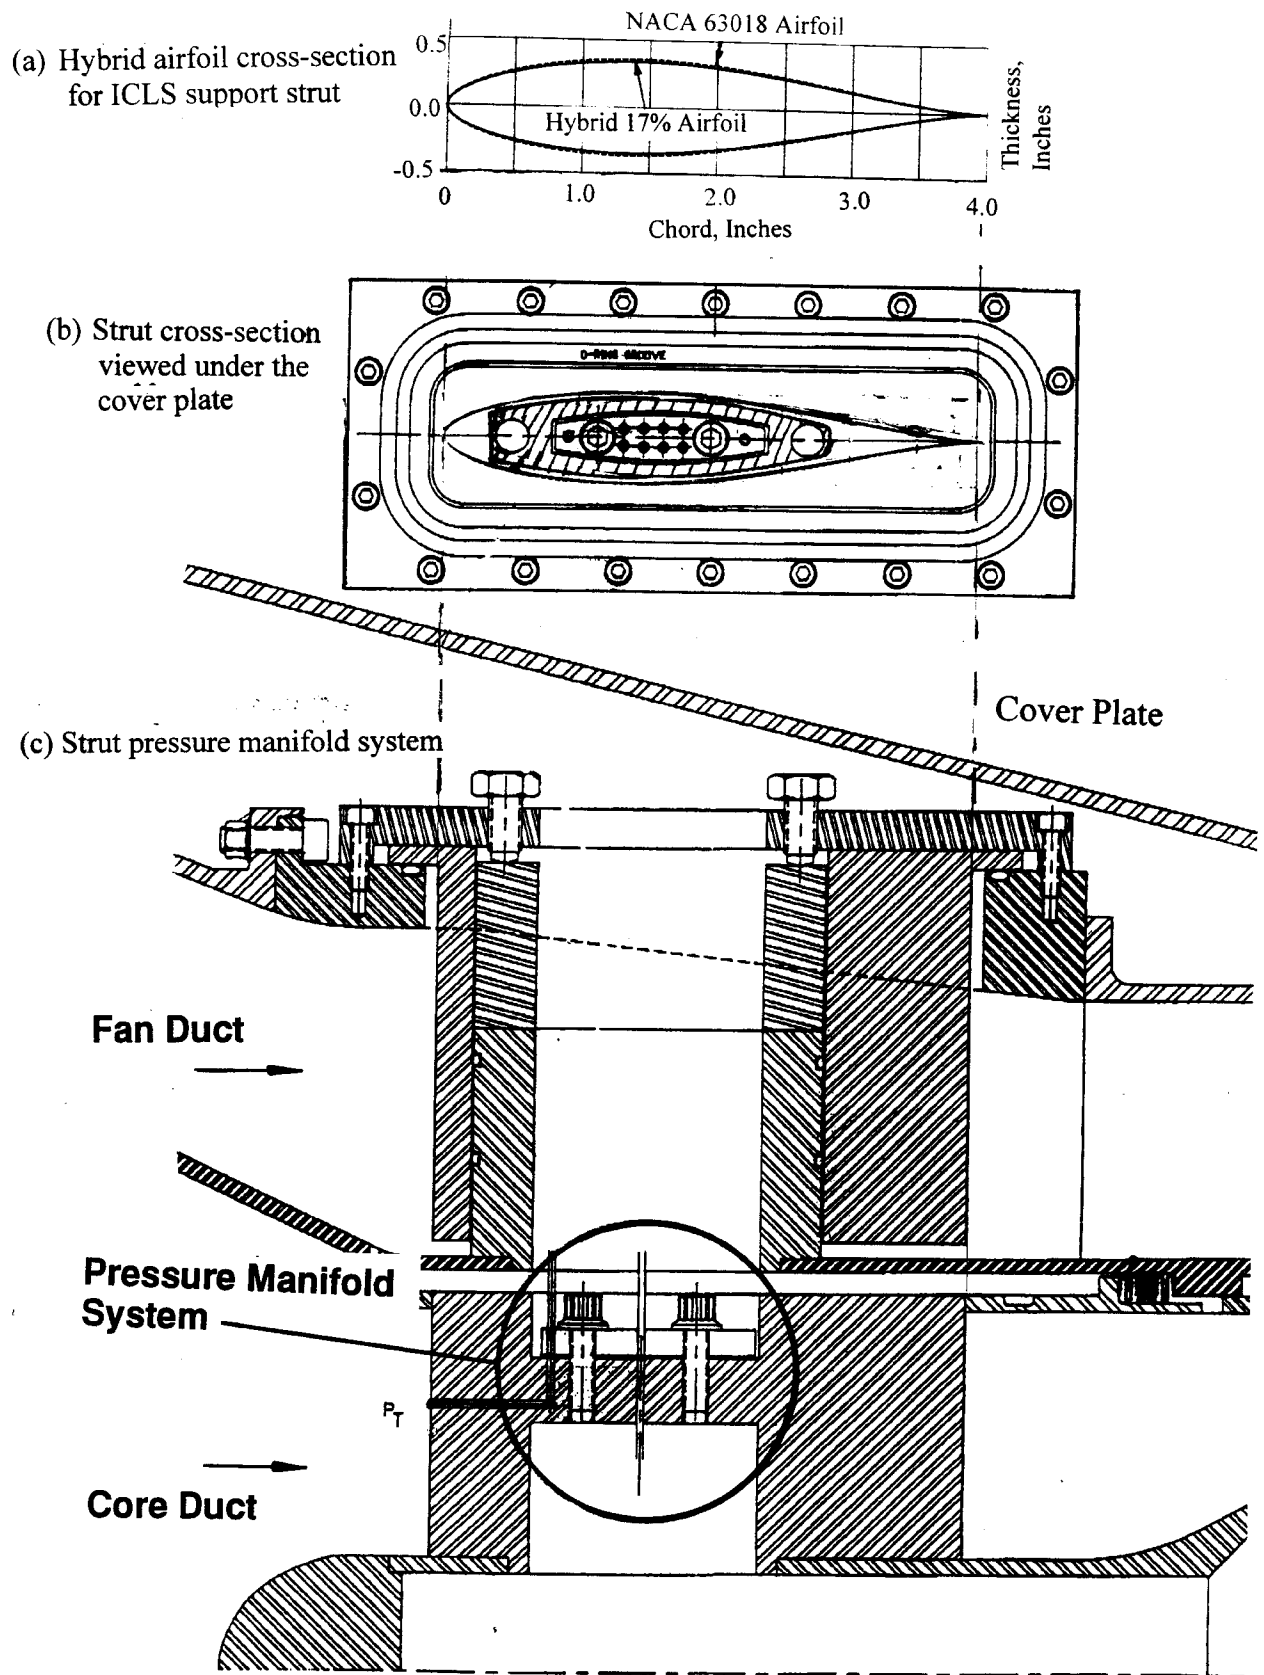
Strut aerofoil cross sections and the strut pressure manifold system for E<sup>3</sup> mixers tested in Cell 41 Anechoic Free Jet Facility.
